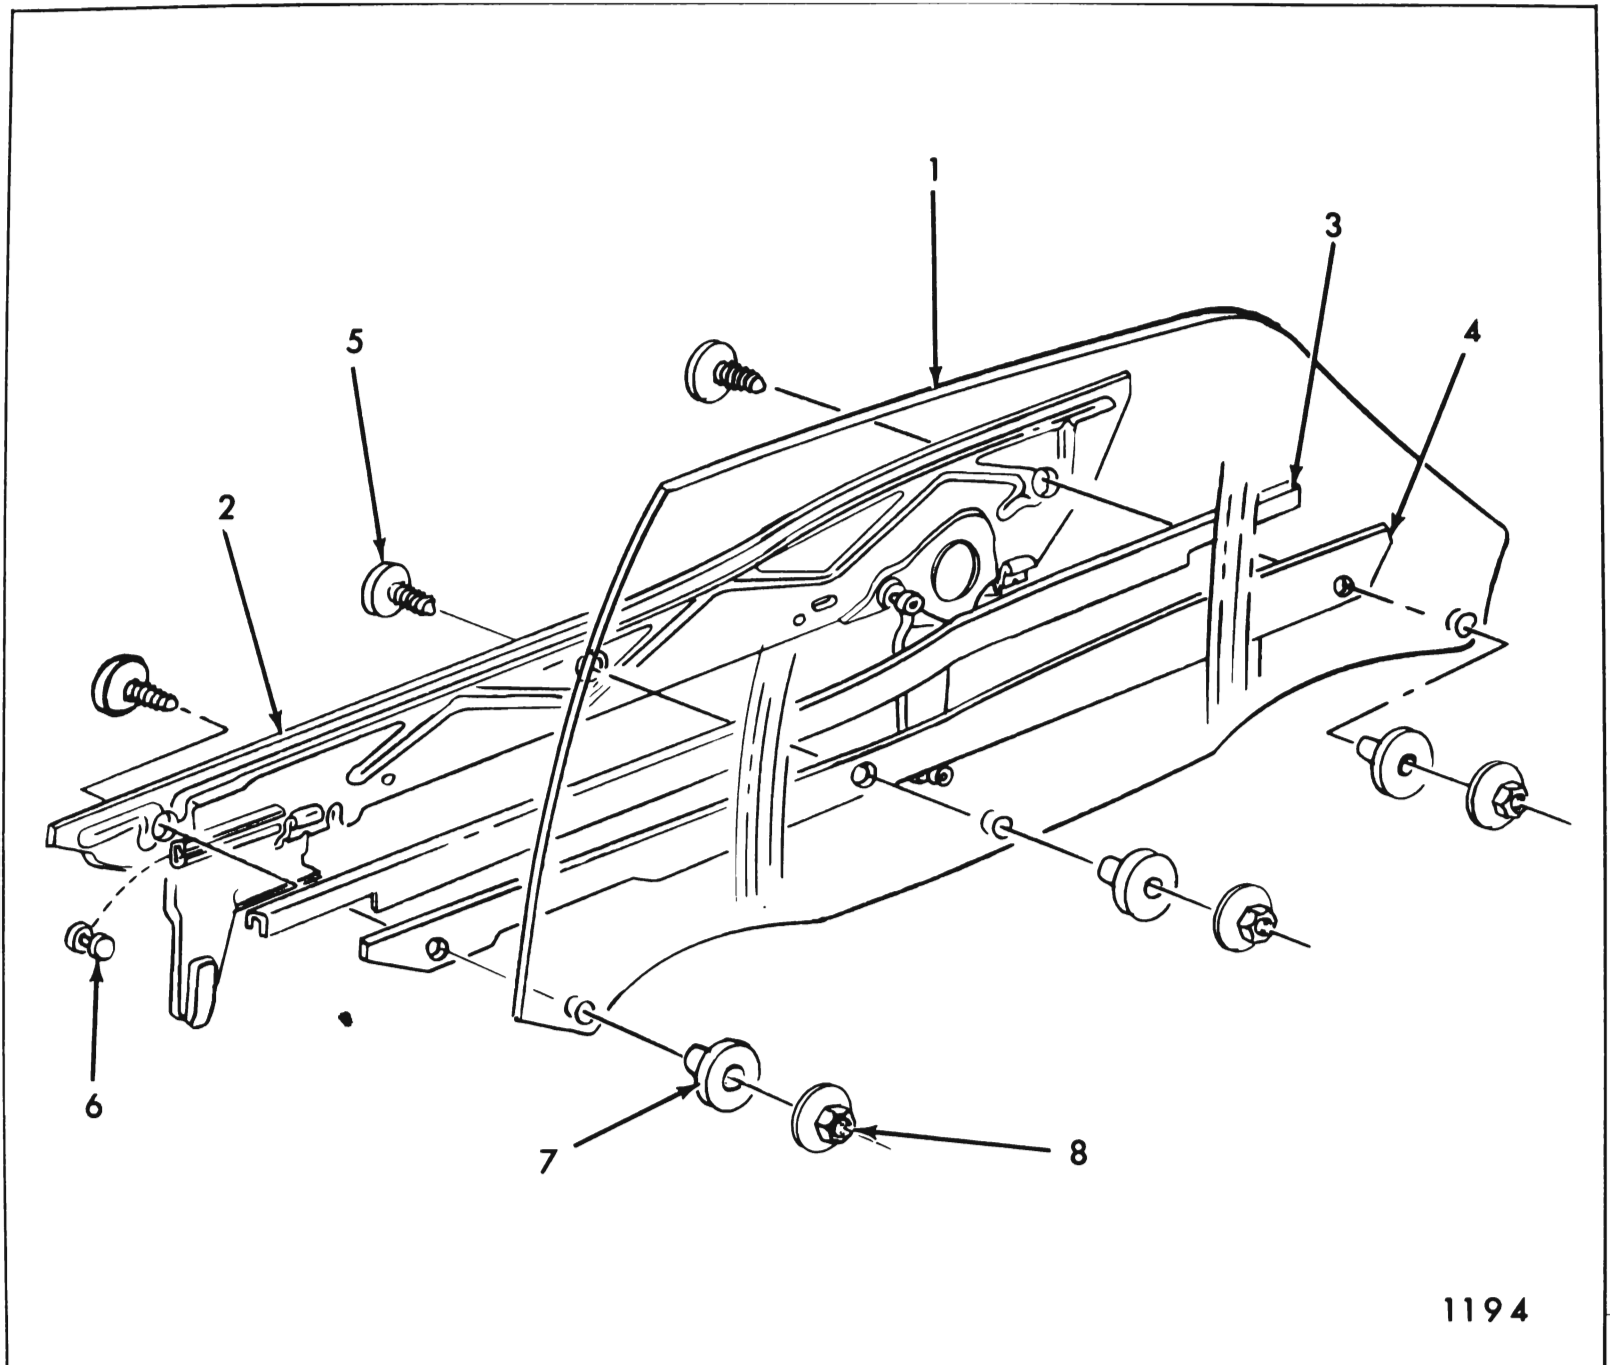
Rear Door Window Assembly "C-69" Styles Except 68069-68169 Styles
